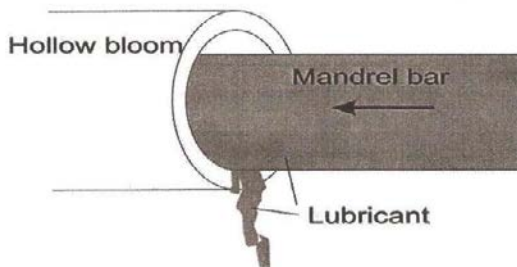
Lubricant Removed While Mandrel Insertion to The Hollow in the PQF
